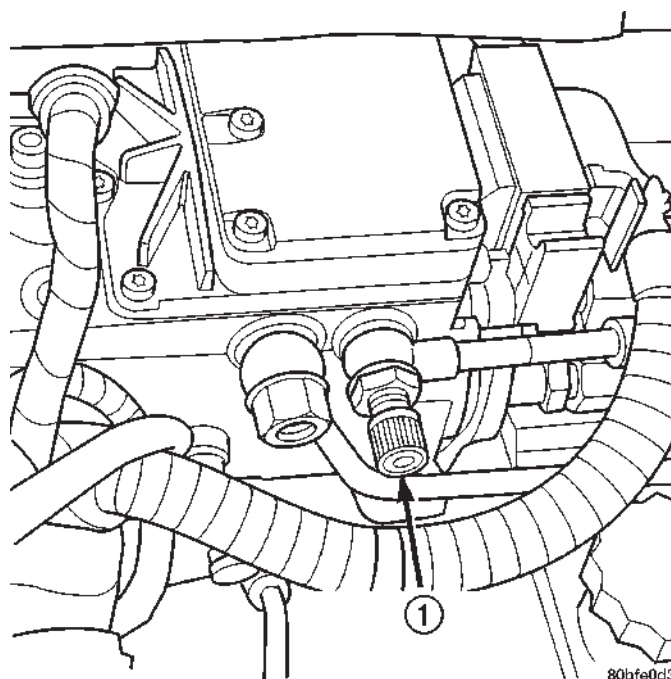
Fuel Pressure Test Port Fitting (Outlet)
